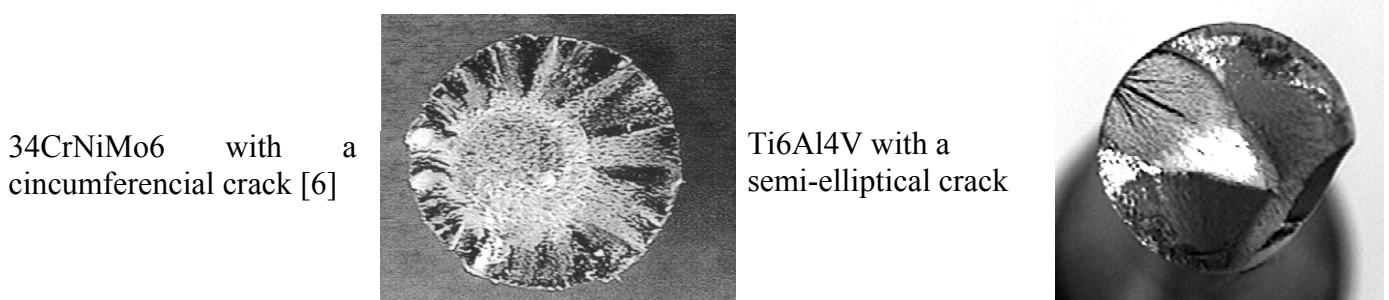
Macroscopic appearance of fracture surfaces under a test with $R=-1$ with steady torsion.
